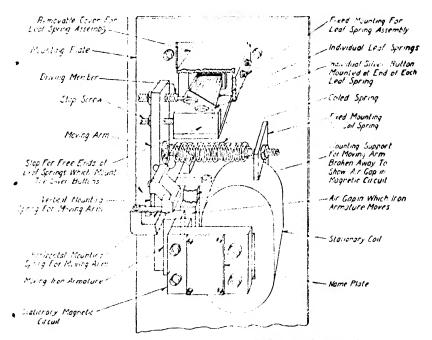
Pictorial Diagram of Main Control Element of Westinghouse "Silverstat" Regulator Courtesy of Westinghouse Electric and Manufacturing Co.
